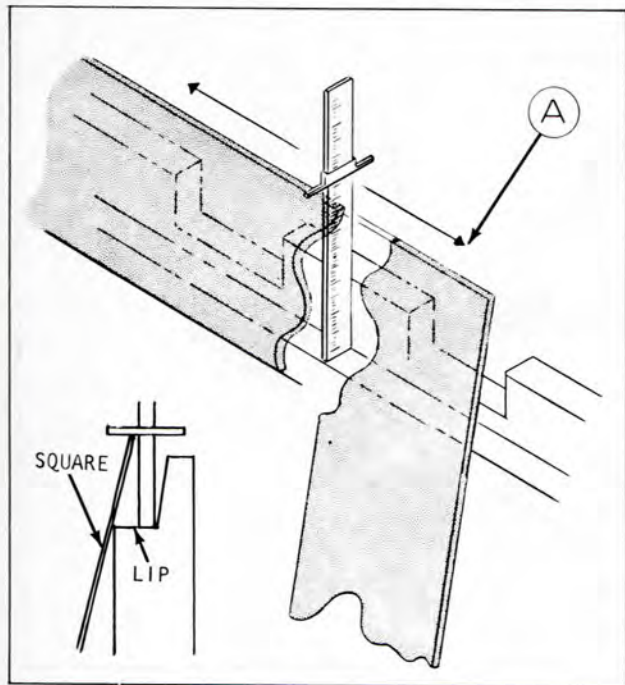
Squaring Carriage Rollers (Six Roller Carriage)
